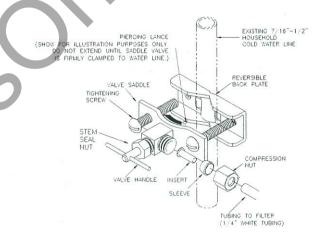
B Saddle Tapping Valve Assembly P/N 34900001 installed on 7/16" – 1/2" O.D. Tubing
